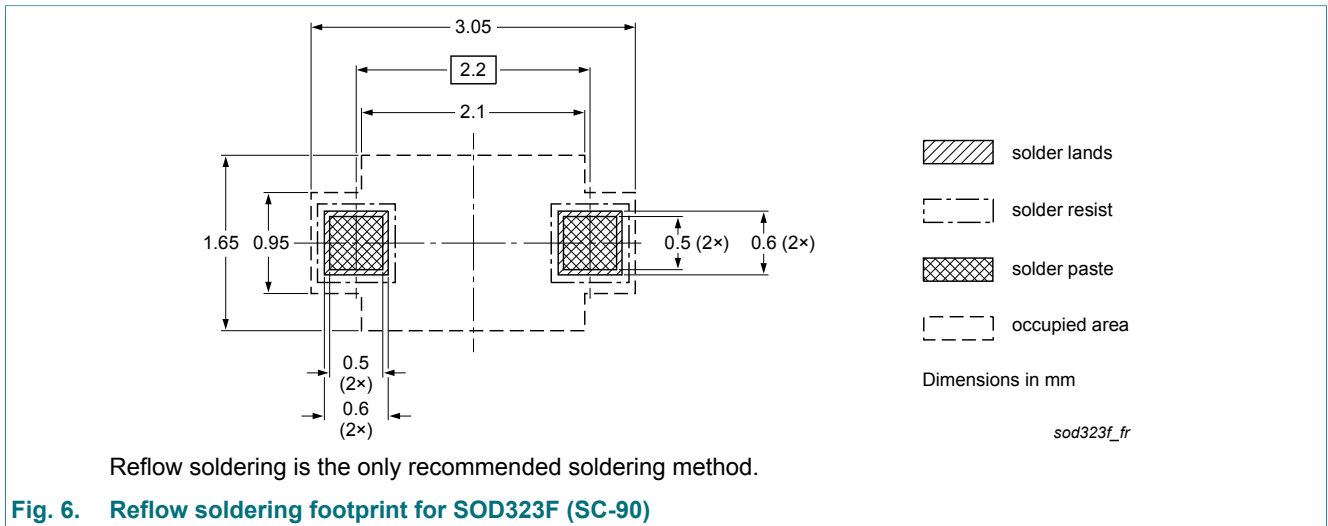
Reflow soldering footprint for SOD323F (SC-90)
